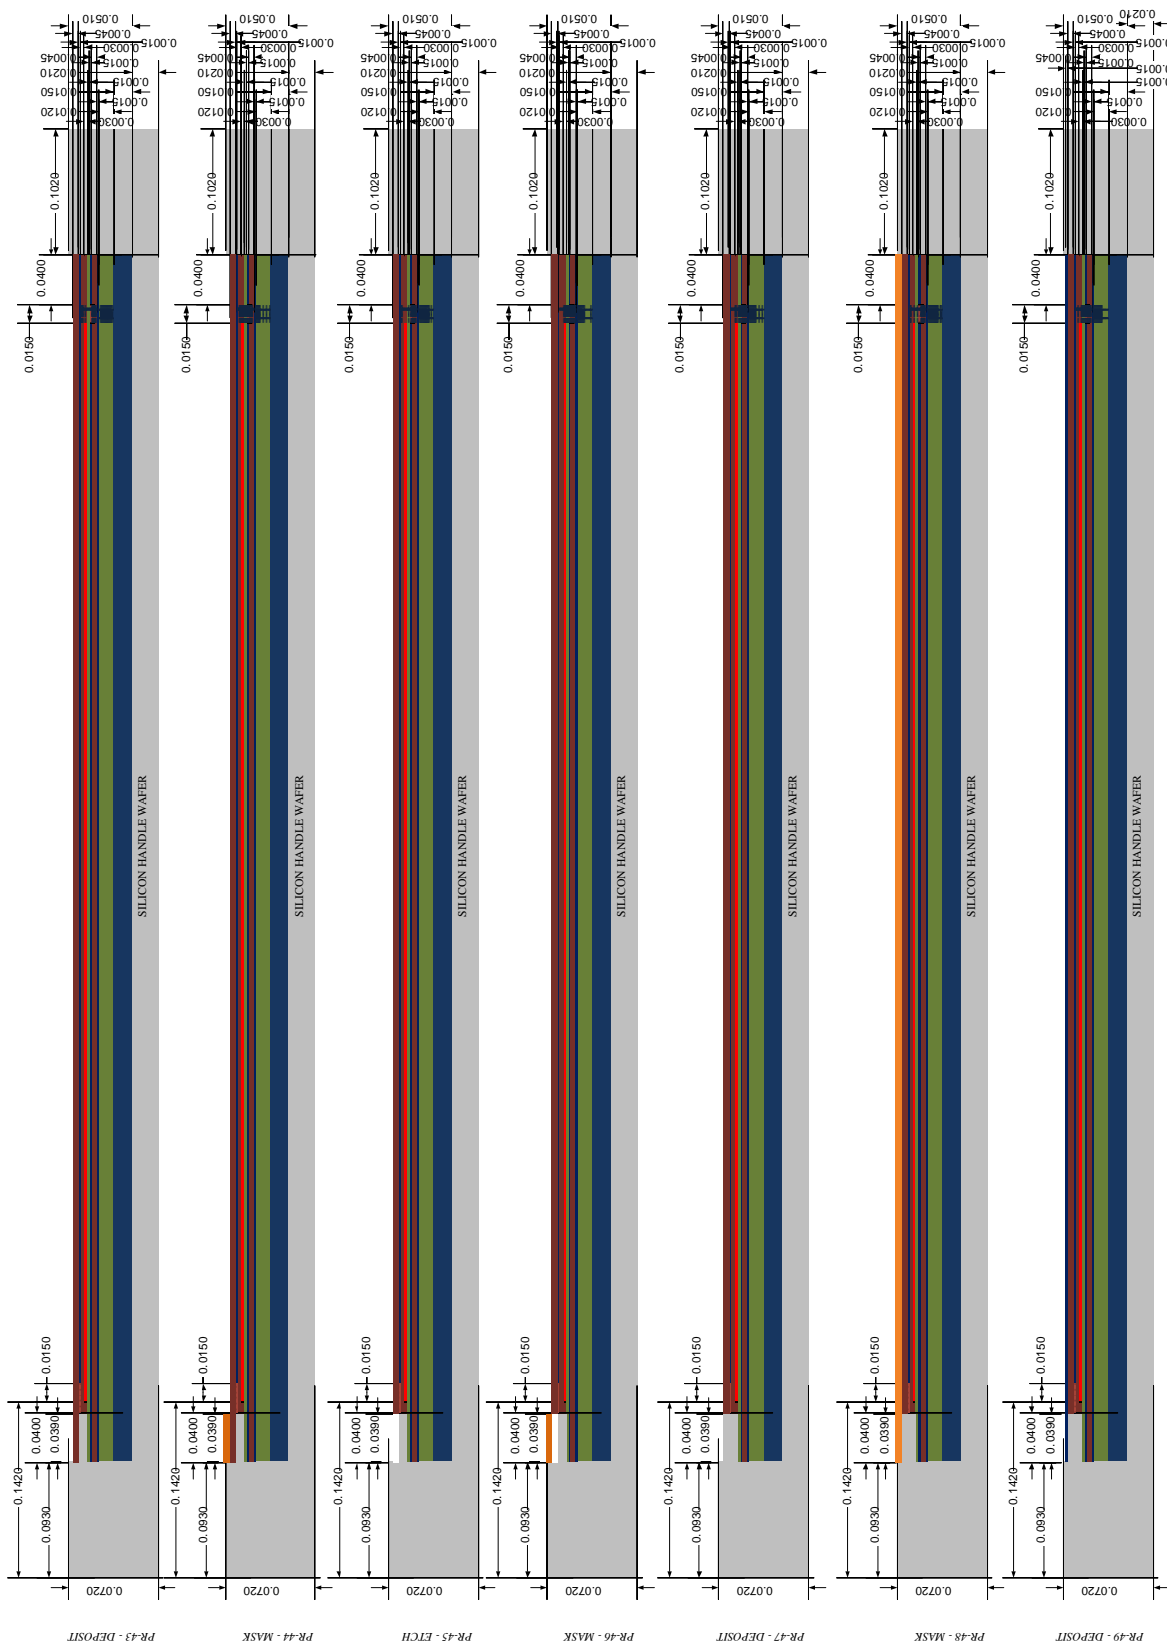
12 SPM micro generator prototype fabrication process layout 7
